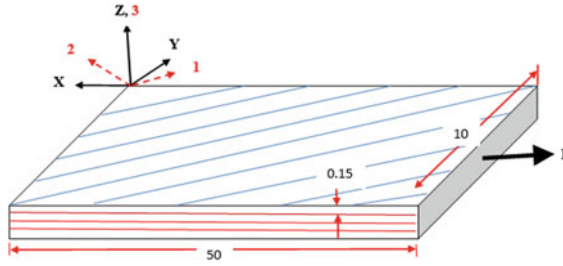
Schematic draw and dimension of the laminate (all dimensions are in mm)
